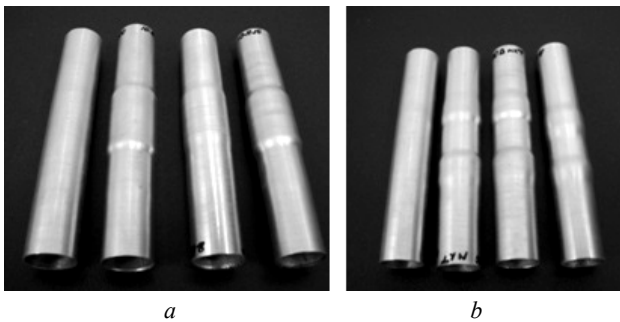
Parts with one (a) and two (b) cylindrical protrusions, made using «cut» pulses
